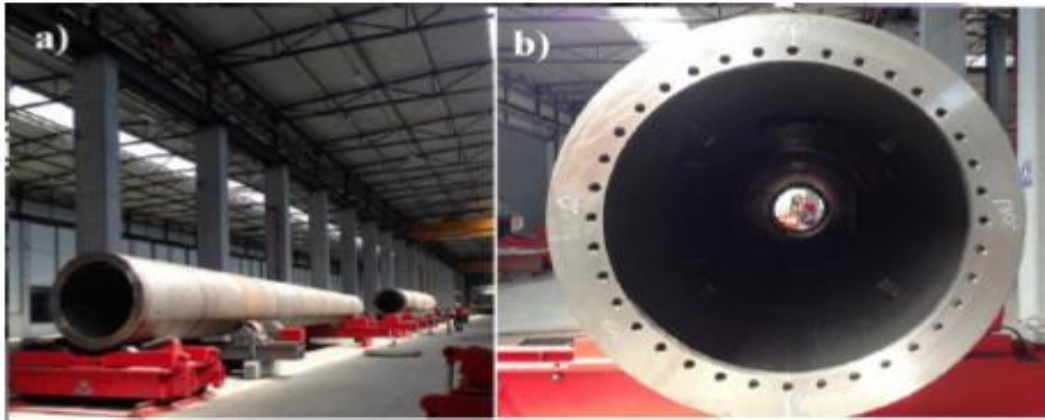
a) Steel cylindrical tower b) Flange connection.
